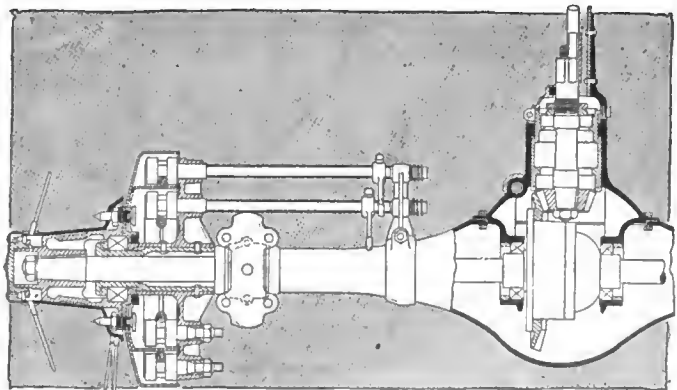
The McCue Company's model 7XW rear axle of the floating type. This design is shown fitted for wire wheels of the McCue make
